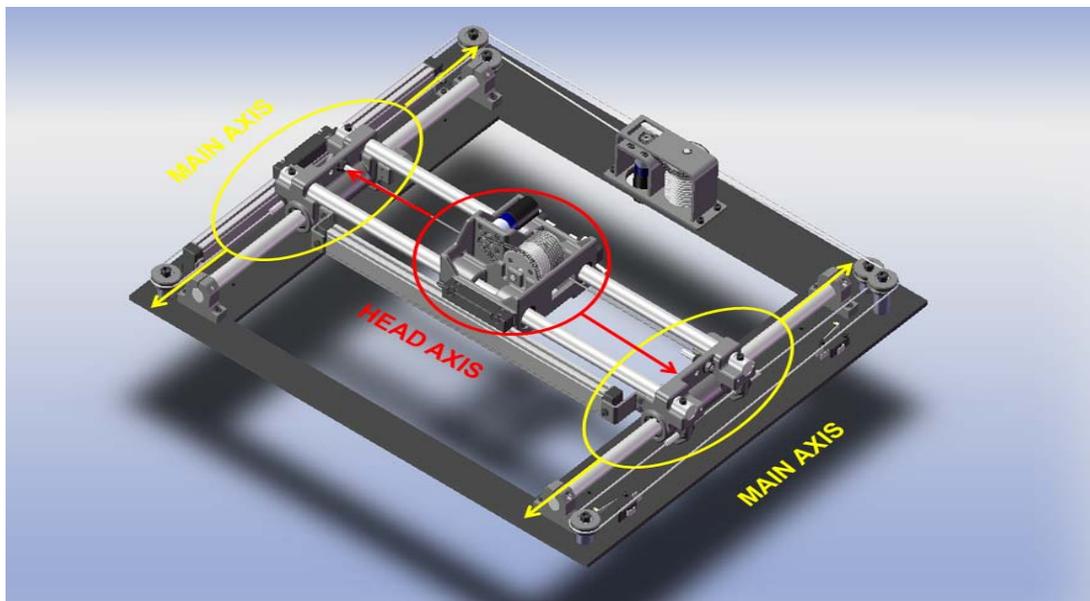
Assembly View of the System Showing the Two Axes Motion
